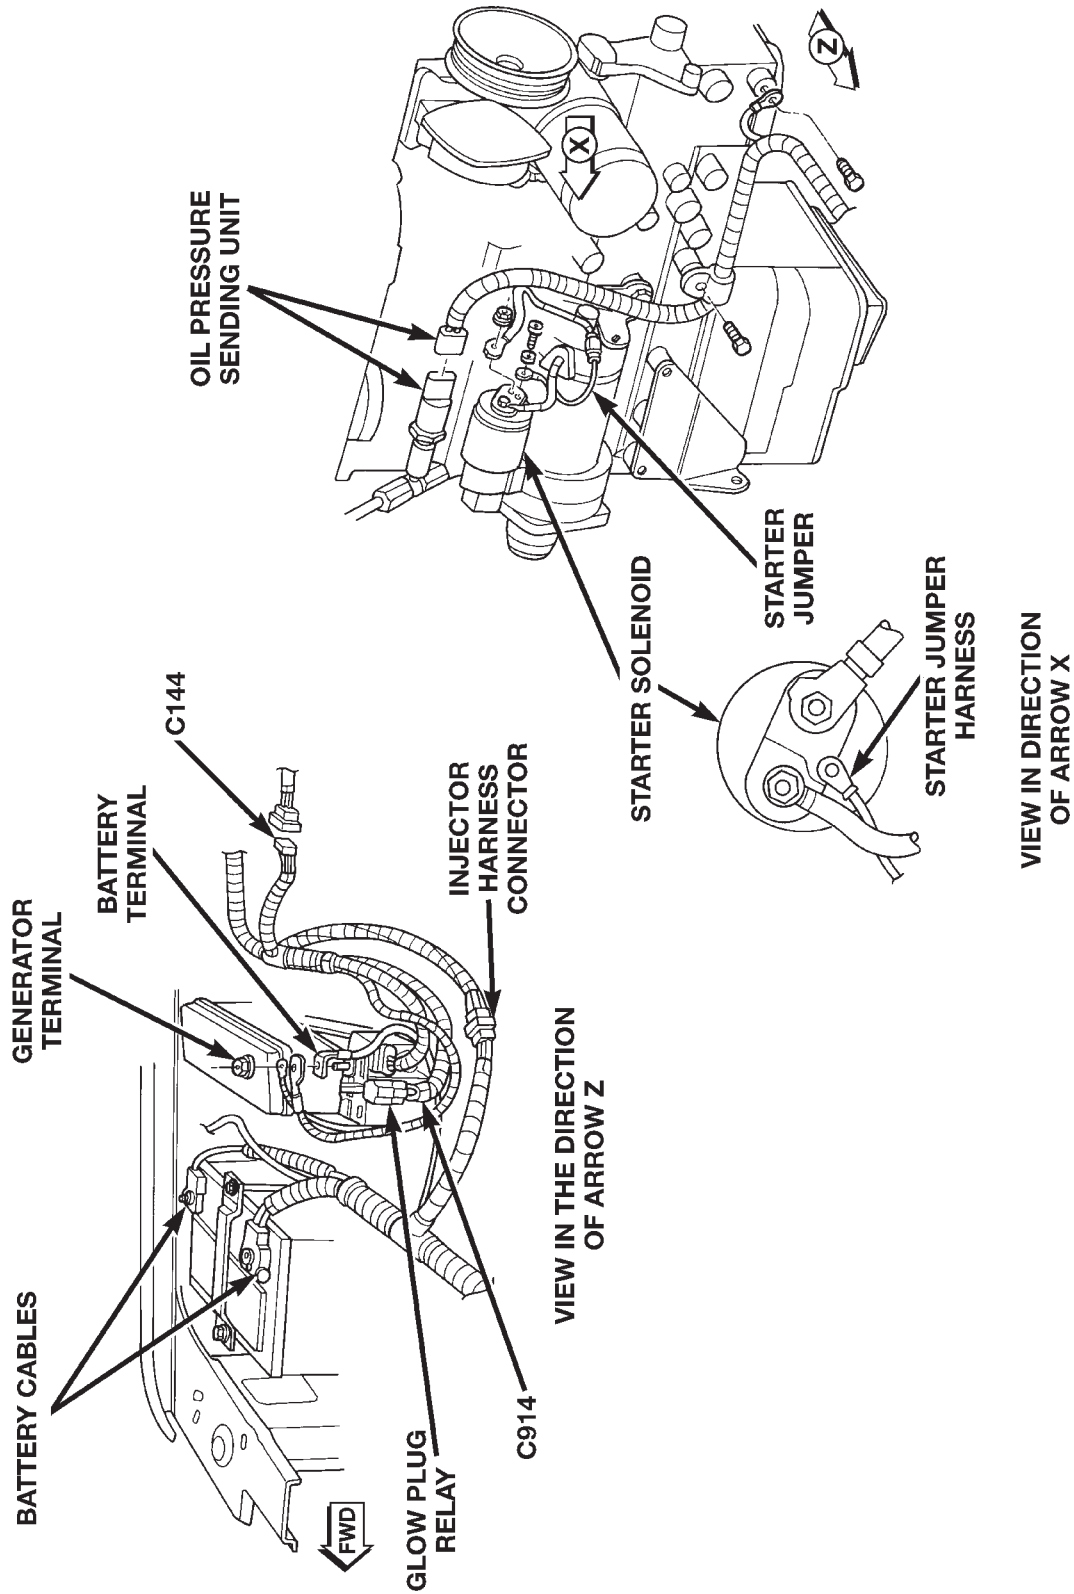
Battery and Starter Motor Connectors—Diesel Engine
